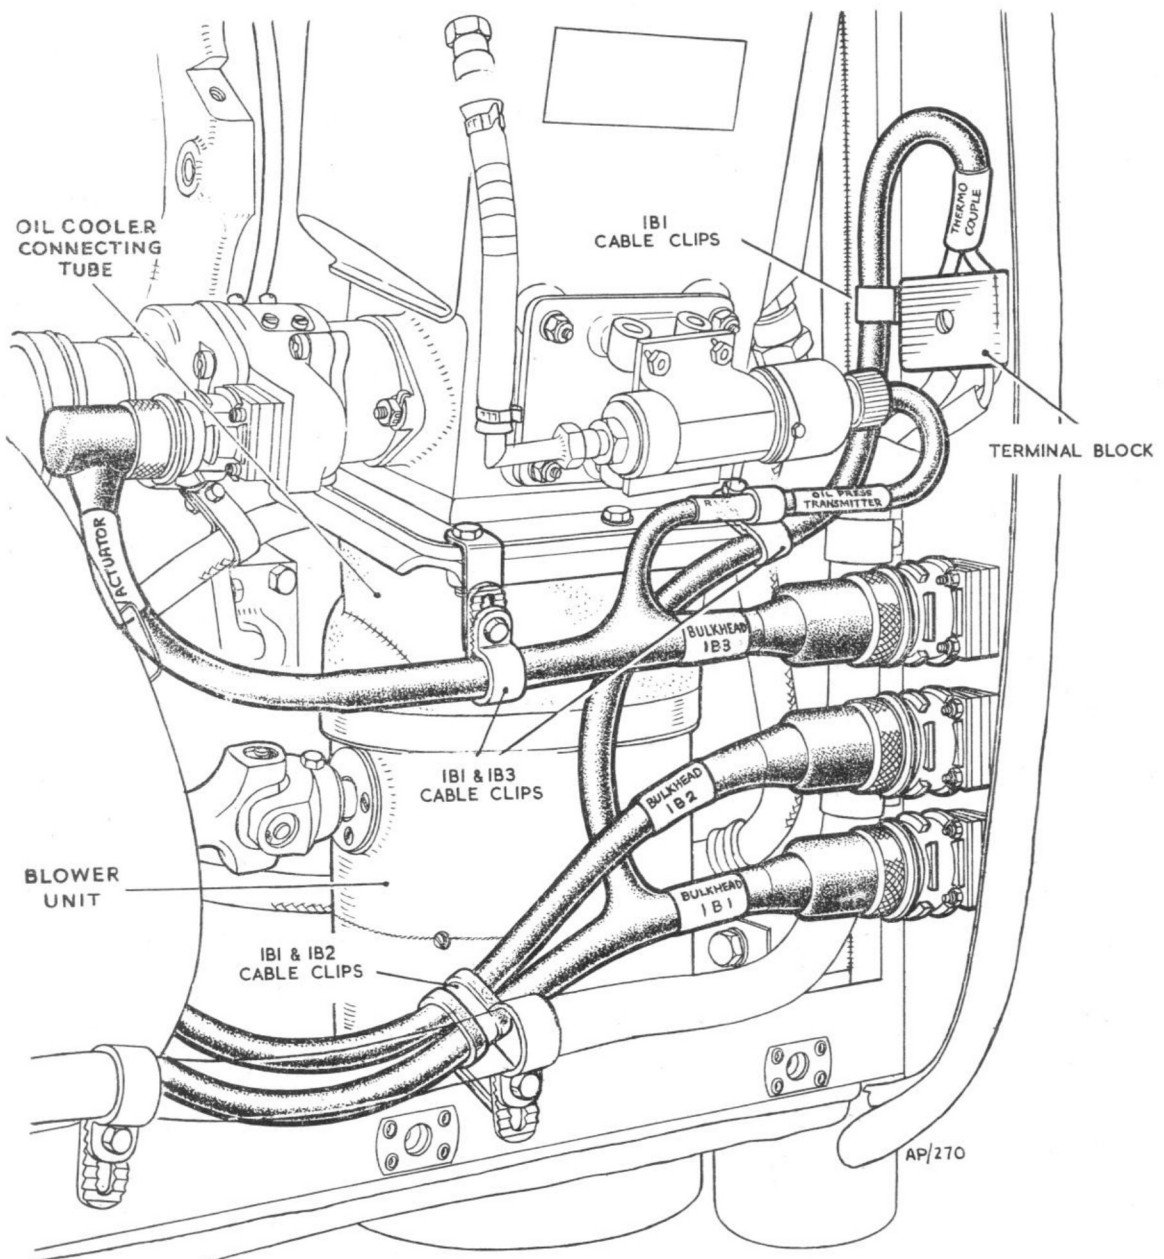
Disconnecting cable assemblies to provide access to blower unit
